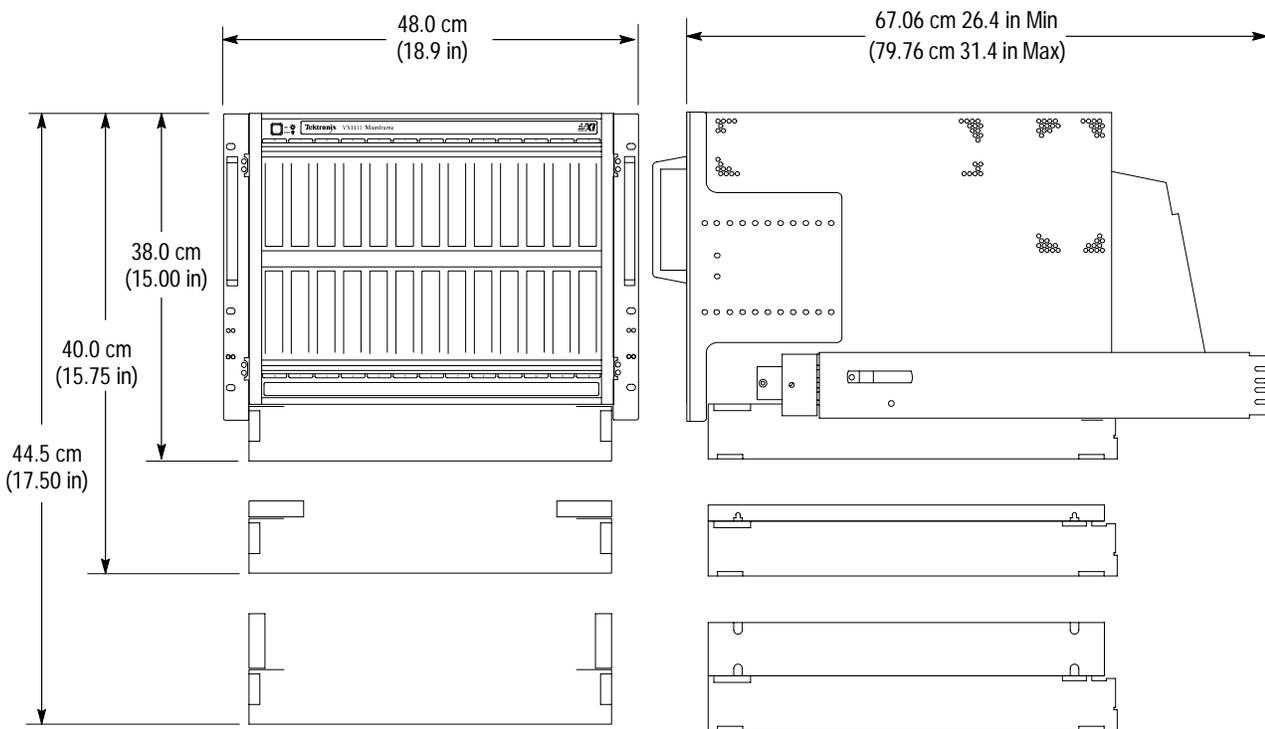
Front view and side view of VX1411 Mainframe with Option 1U and rackmount option
